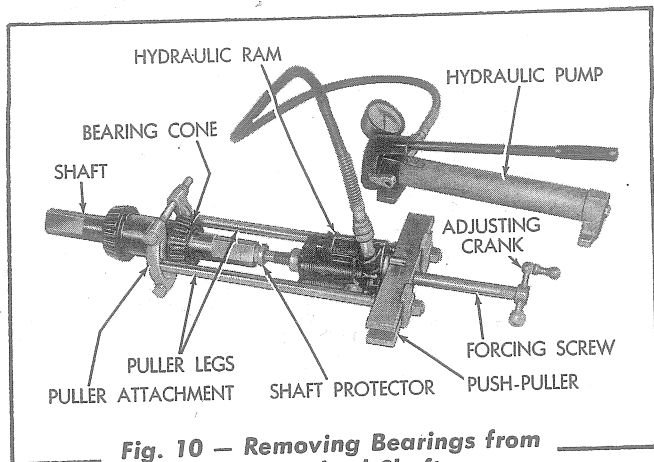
Removing Bearings from Truck Wheel Shaft
